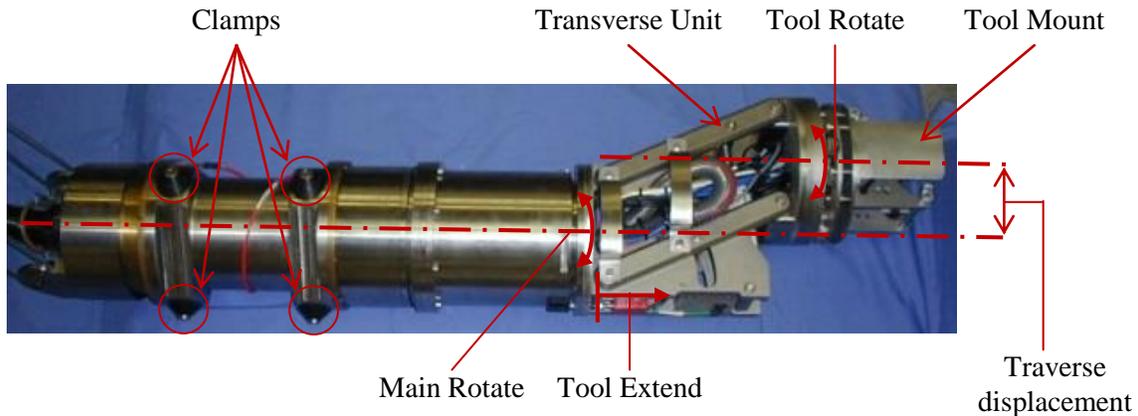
RTS Tool Body (Traverse Unit 'Deployed')
